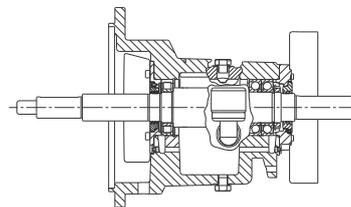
Bearing bracket with oil-lubricated roller and double angular-contact bearings
